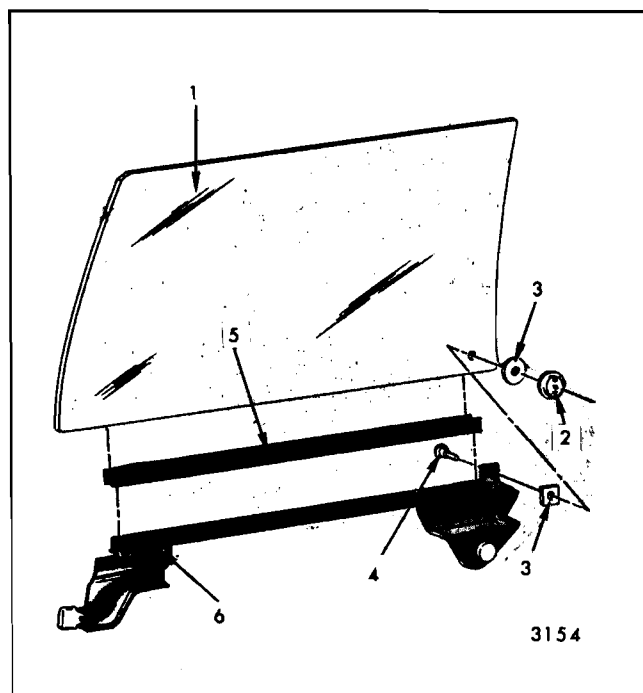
Front Door Window Assembly - "A-39" Styles
